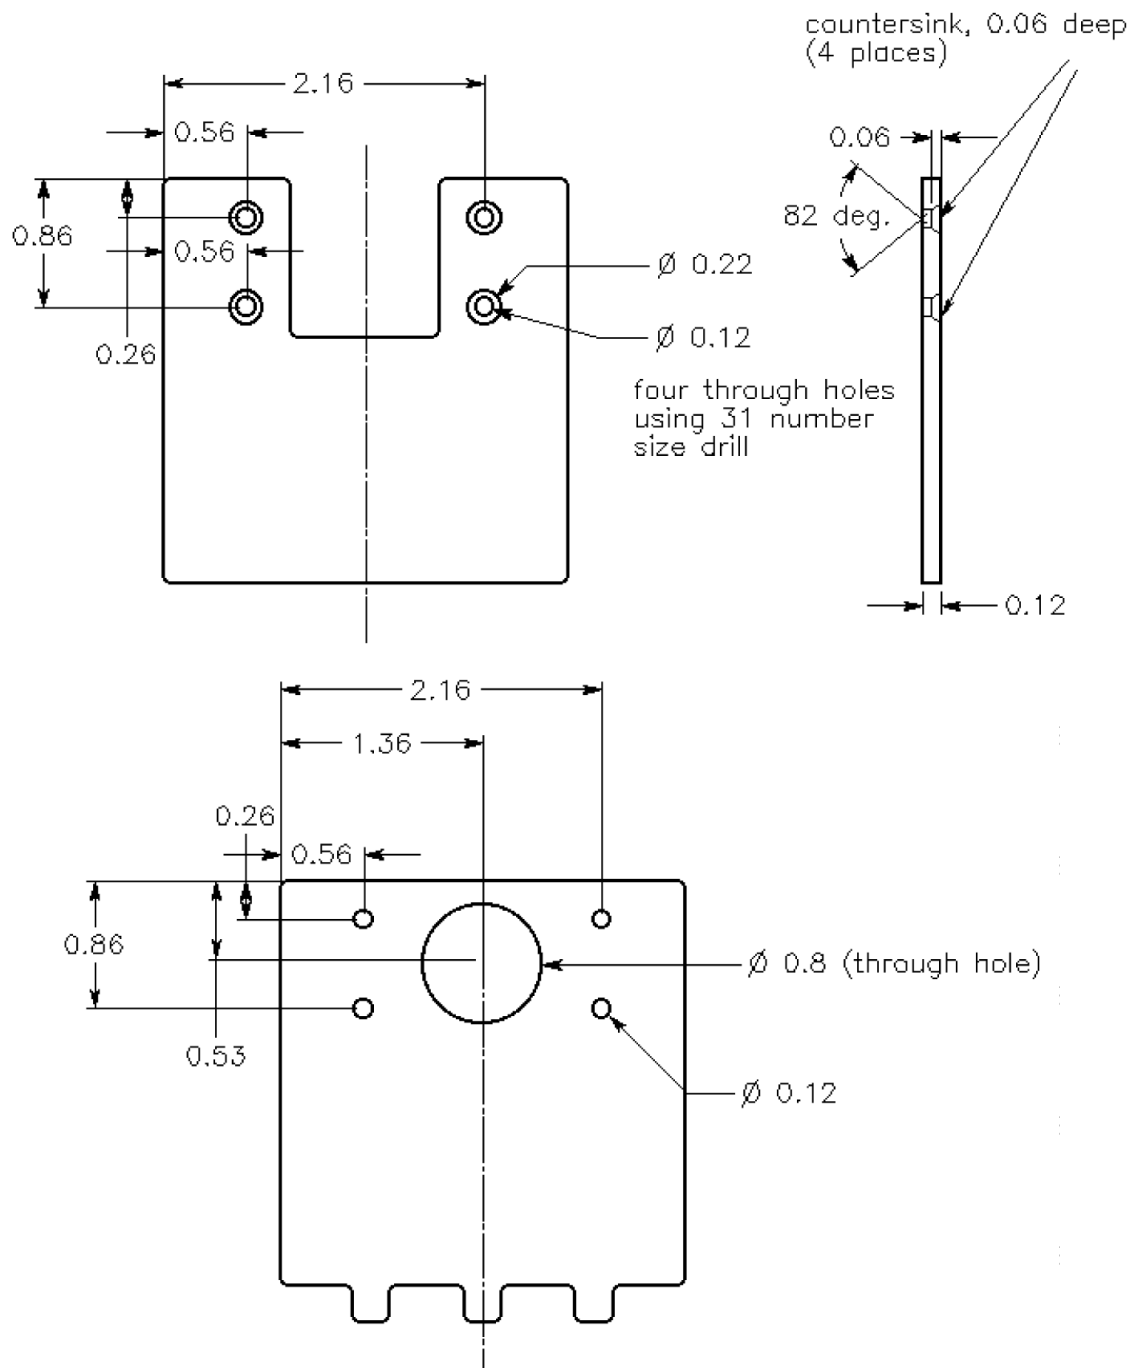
The Mount (top) and Back plate (bottom) of the lens assembly modified to hold the heater. All dimensions are in inches.
